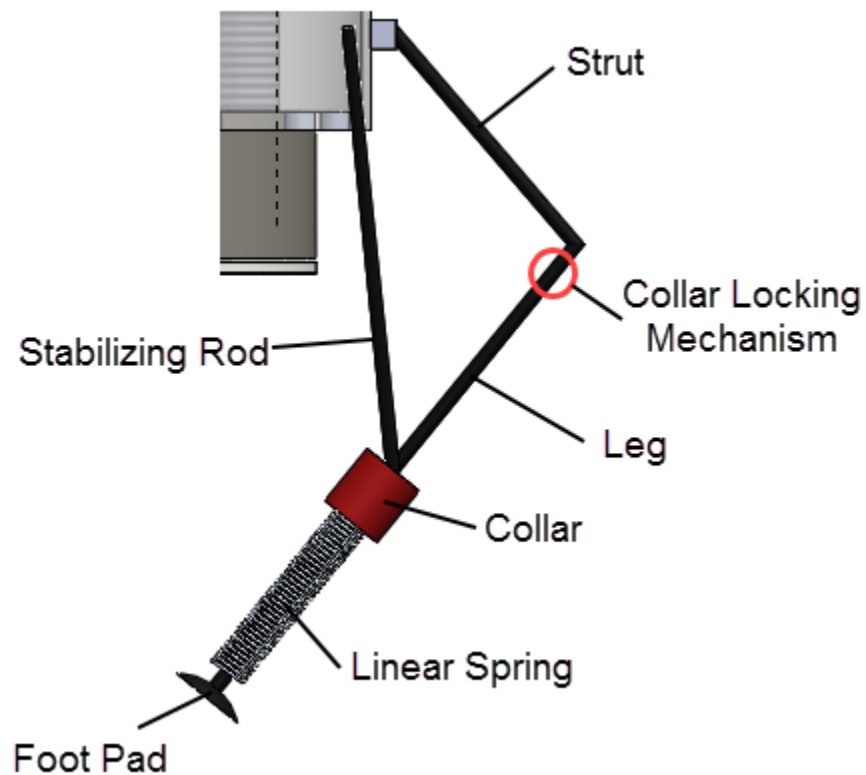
Strut-Truss ULS Diagram, Stowed Configuration
